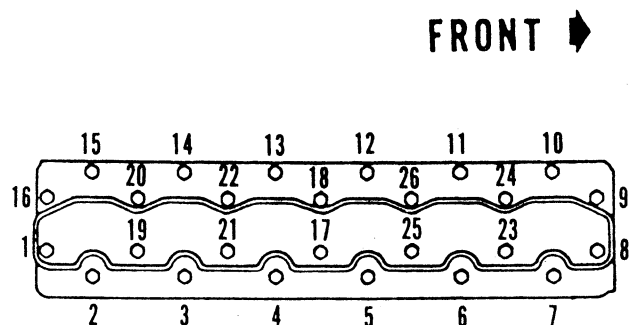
Use the sequence shown to tighten the cylinder head retaining cap screws.
